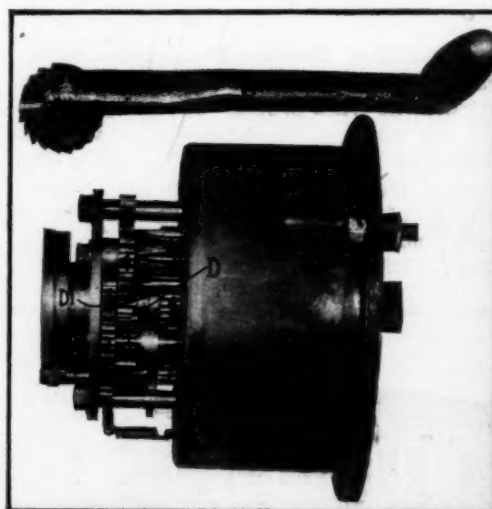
Mechanism of the Volkmar starter with brass cover removed. Gearset 1, 2, 3, 4, 5, 6 serves to wind the starter spring inside the housing; dogs D, D1, engaging when pedal is pressed to start motor; Geneva gear G regulates relation of dogs; S, motor shaft
